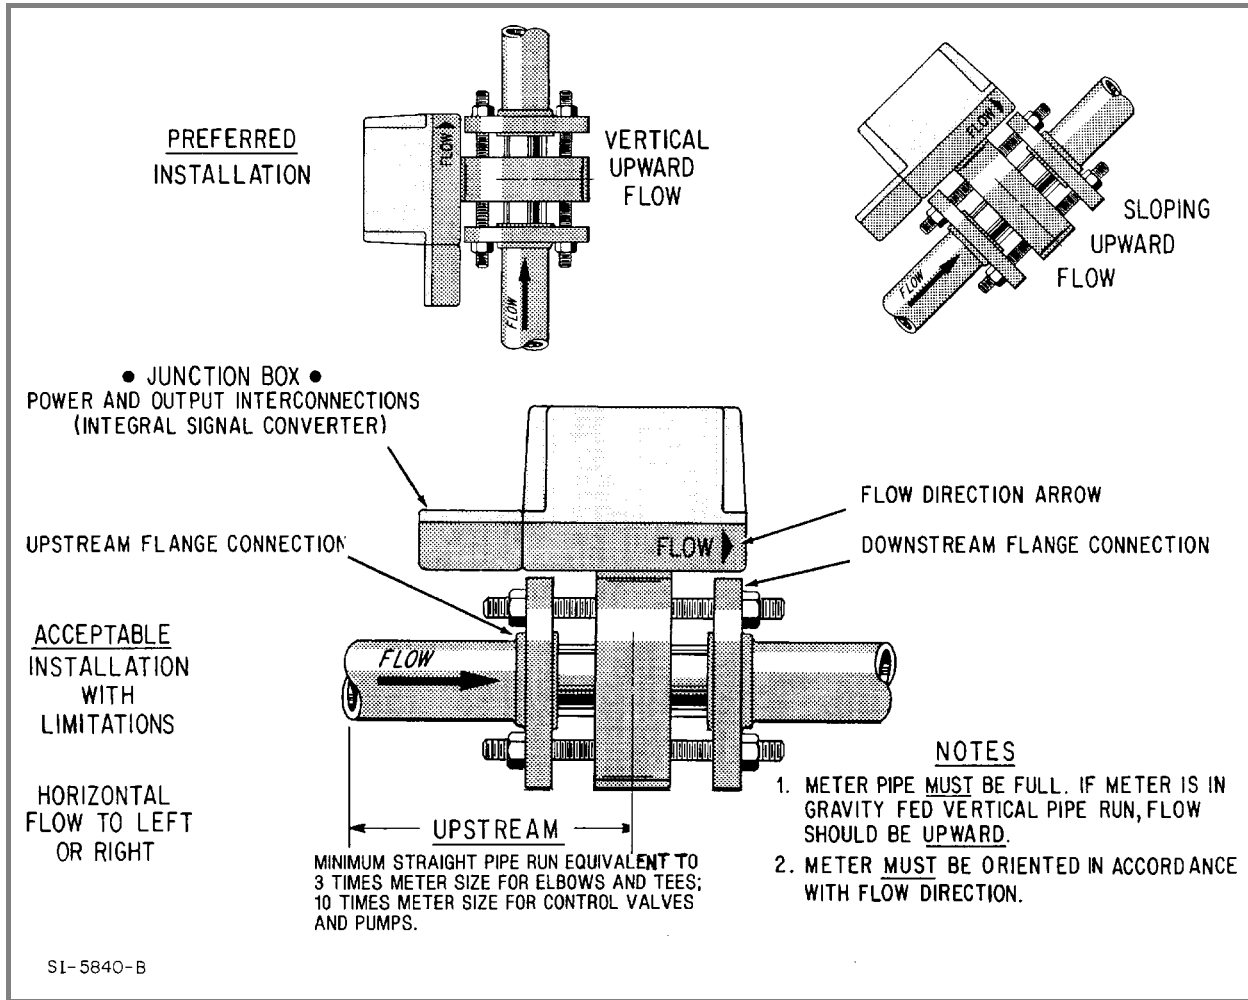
RECOMMENDED PIPING ARRANGEMENT
